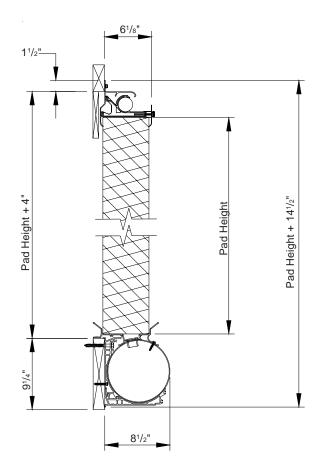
A SIDE VIEW COMPLETED ASSEMBLY
